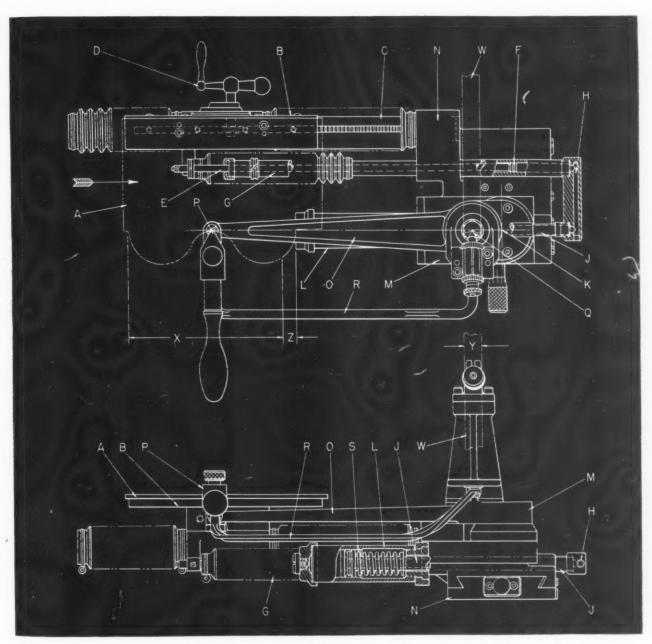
When Templet A is Moved to the Right, Hydraulic Fluid in Cylinder G is Forced into the Left-hand End of Cylinder L to Move the Diamond Dressing Tool Q across Grinding Wheel W
